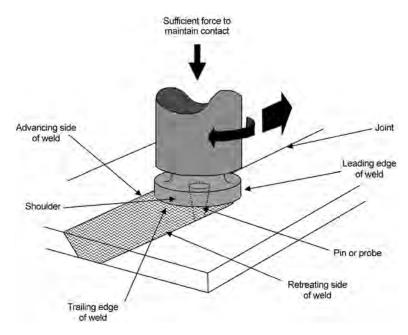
Friction stir welding process. Source: Ref 6.10
